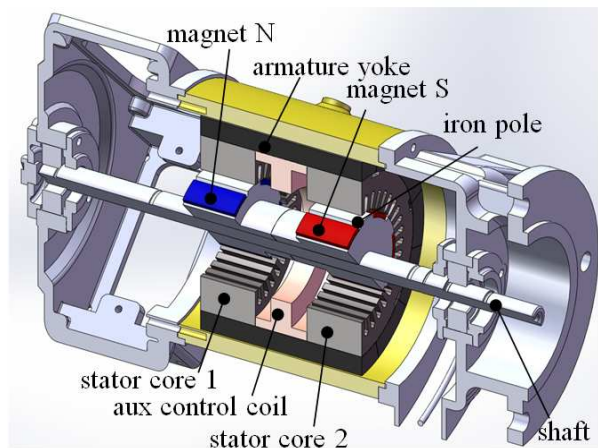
Cross section of ECPSM machine with the surface-mounted PM rotor and stator structure exhibiting the three-phase single-tooth windings with the fixed excitation control auxiliary coil.
